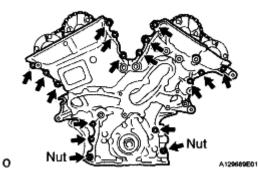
Locating Timing Chain Cover Bolts And Nuts
